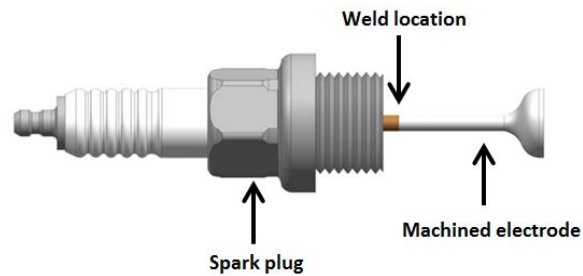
Spark plug to machined electrode interface and weld location
